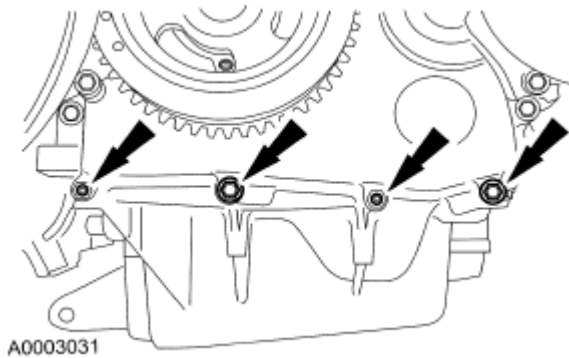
Locating Engine Front Cover-To-Oil Pan Bolts
